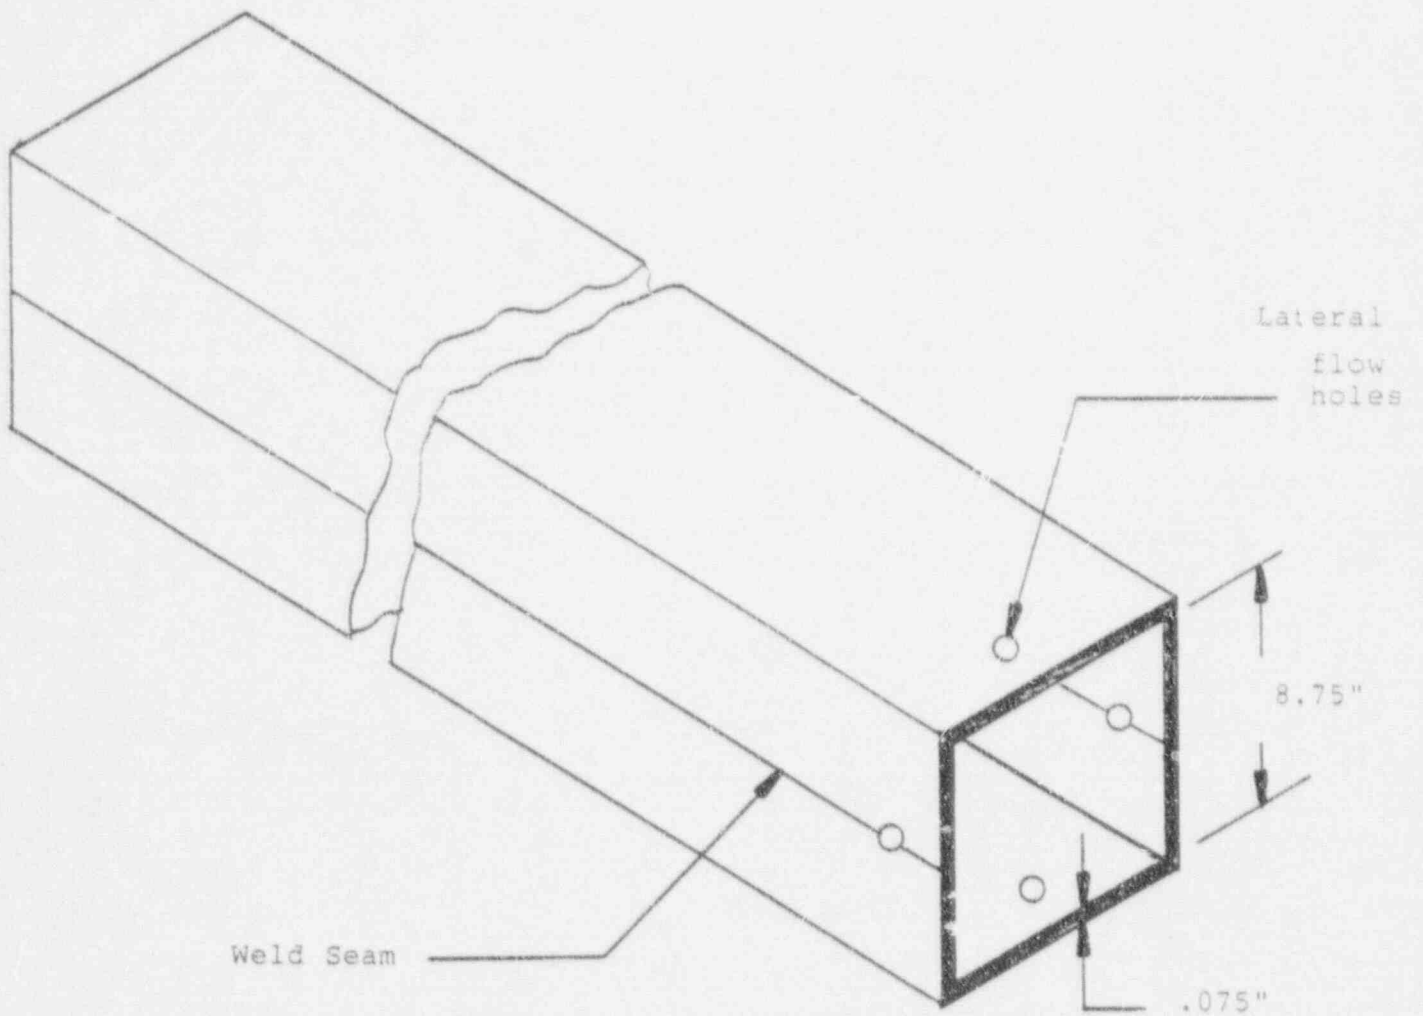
SEAM WELDING PRECISION FORMED CHANNELS
